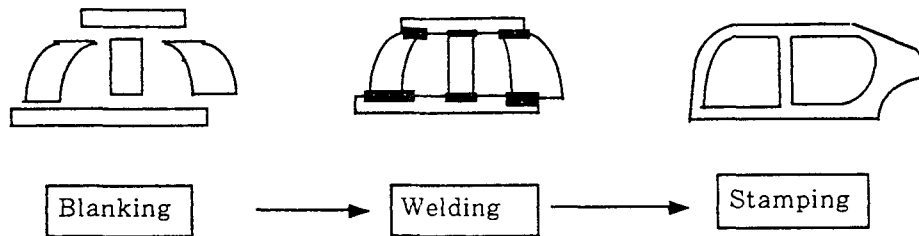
, An Integrated Side Panel Consisting of Laser Welded Blank
